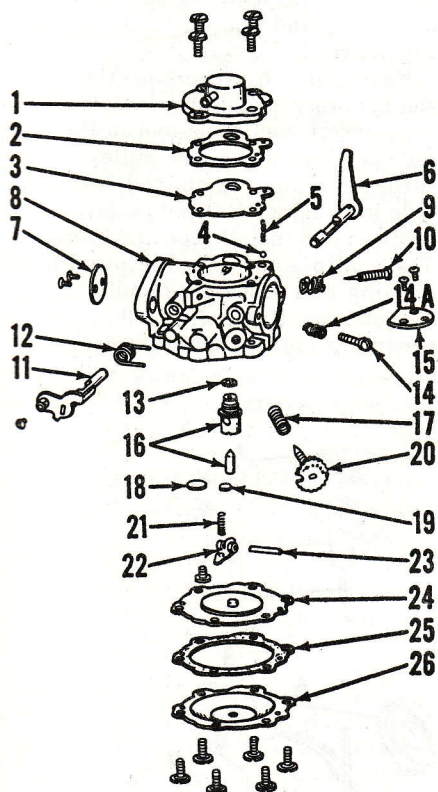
Exploded view of Carter ND carburetor. Carter NRD carburetor is similar.
